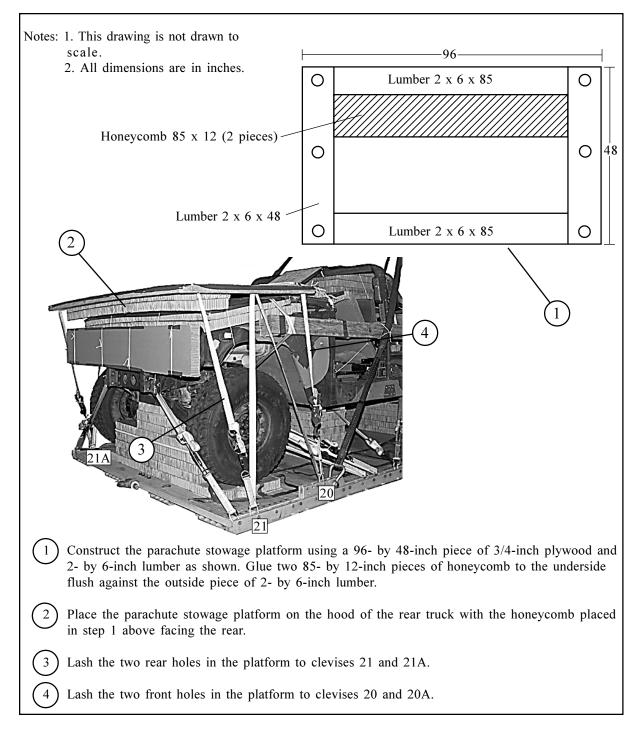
Parachute Stowage Platform Constructed and Installed
